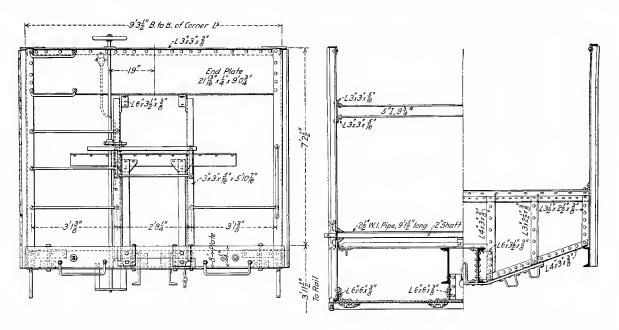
End Elevation and Cross Sections of Norfolk & Western All-Steel Hopper Car Shown in Figs. 16, 290 and 292.
